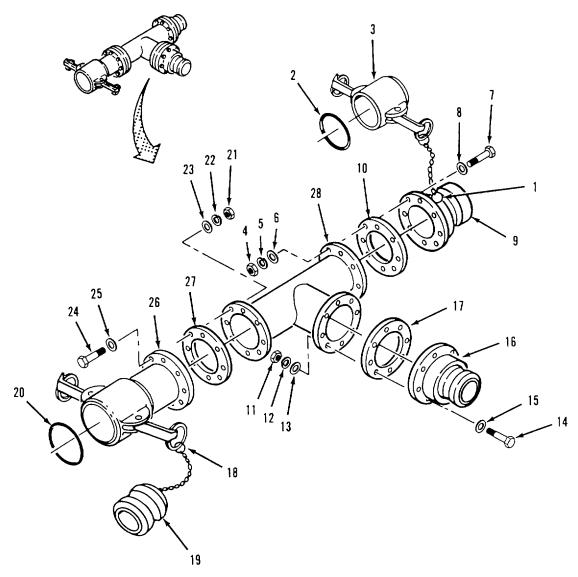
Tee Assembly (9115-Y1) Assembly.
